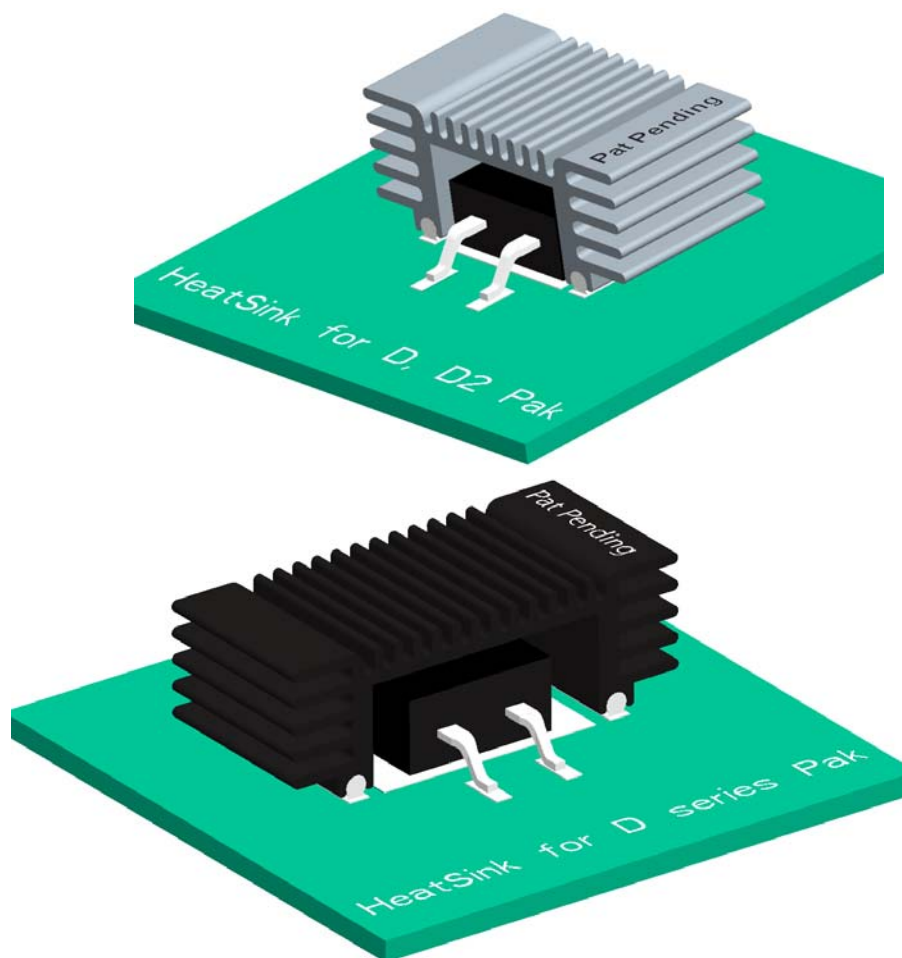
Smart Heatsinks Surface Mounting Heat Sinks (Patent Pending)
